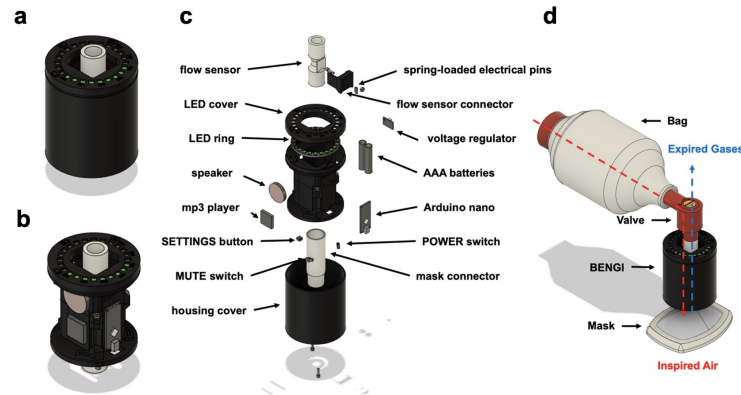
Assembled (a, b) and exploded (c) views of the BENGI prototype, with a diagram of the device in-line with a BVM system (d)
